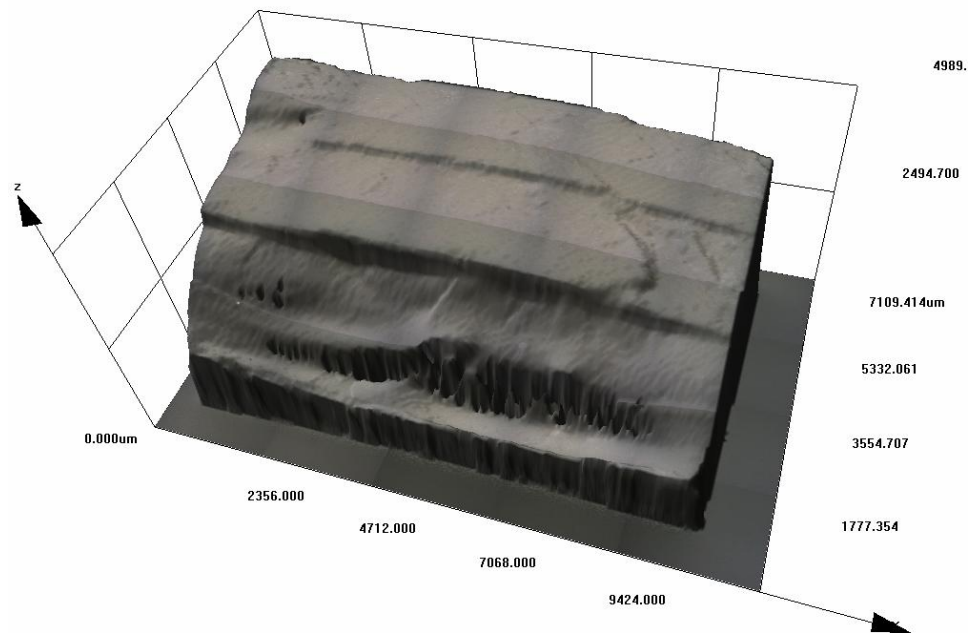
Preview of fracture surface of 9-layered Lam V5A prepared by slip casting.
